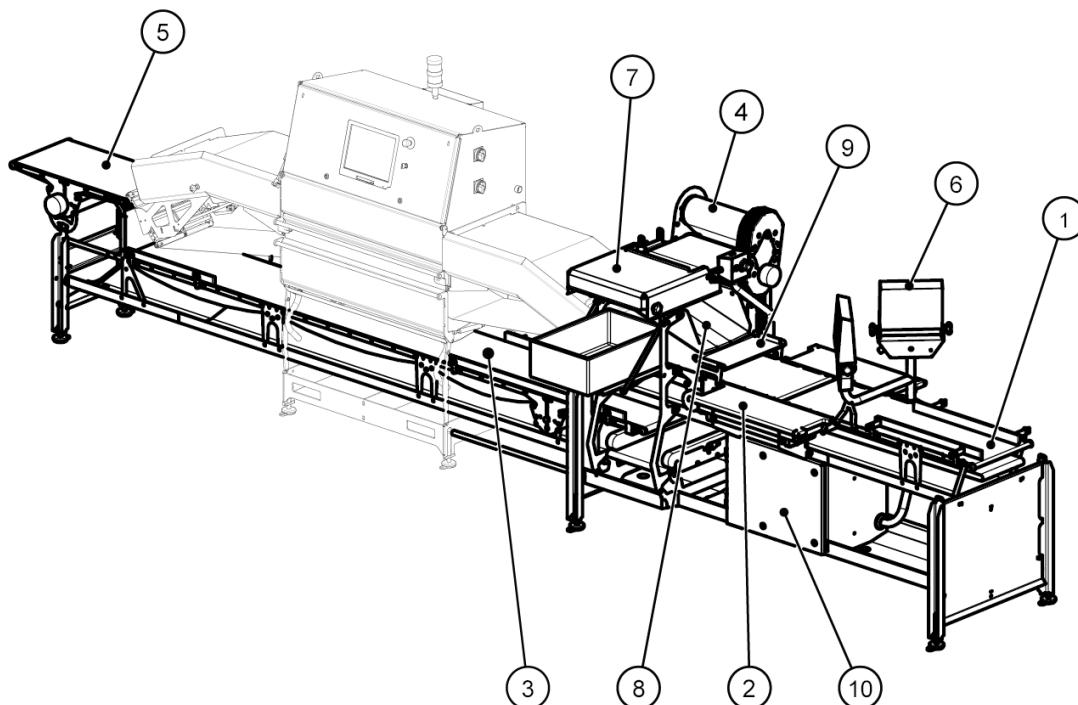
SensorX 302 Basic piece inspection system with reinspection, including optional rework terminals.
